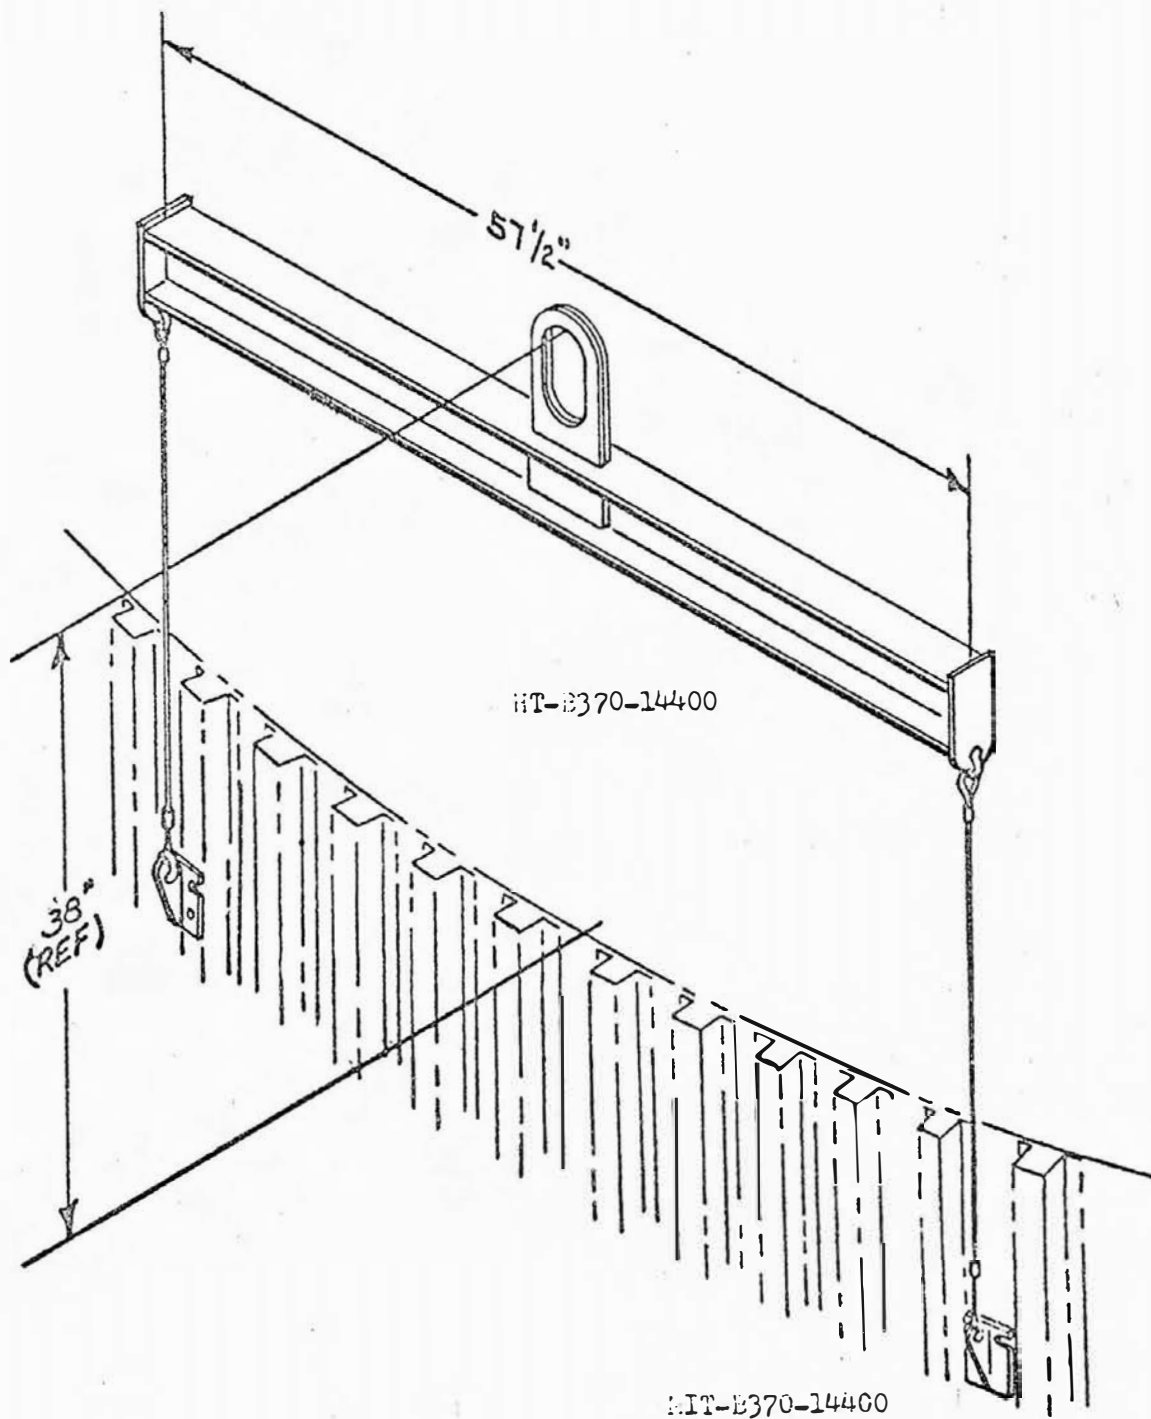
Skin Segment Assembly - Forward Skirt Hoisting Tool
